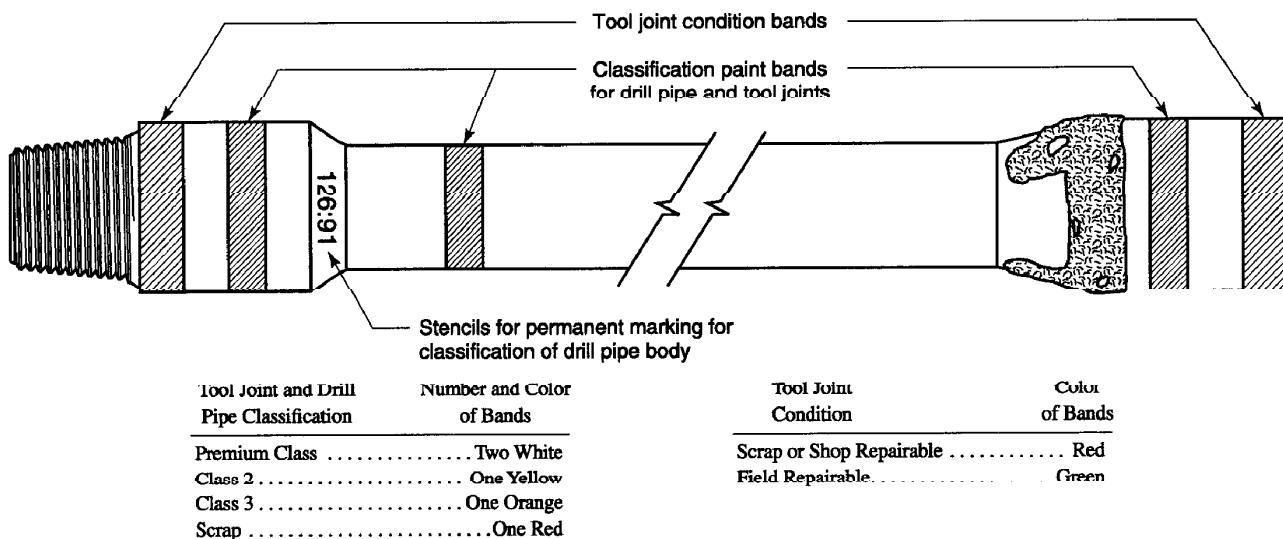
Drill Pipe and Tool Joint Color Code Identification
